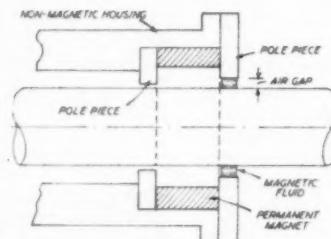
Basic arrangement of magnetic particle shaft seal
